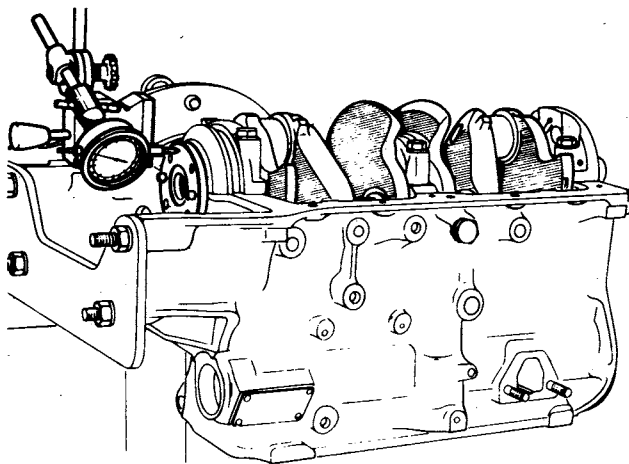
CHECKING CRANKSHAFT END PLAY
